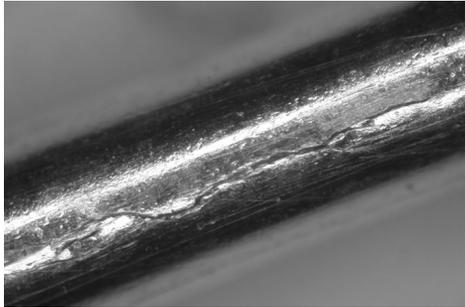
Longitudinal cracks in the welded joint after drawing
